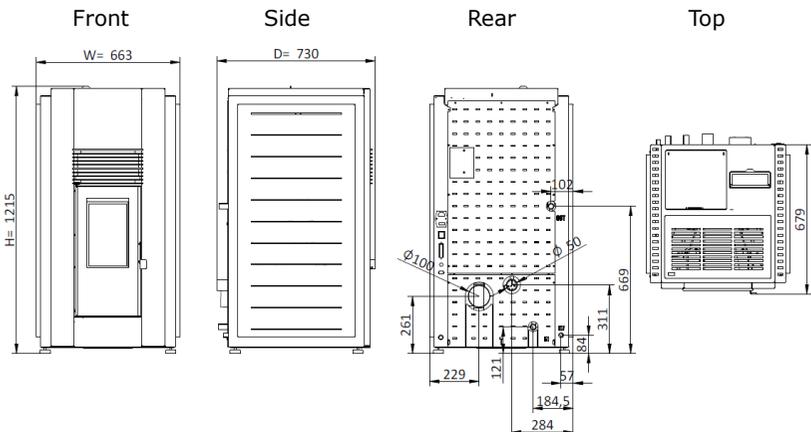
Dimensions of the free standing pellet fire unit (Douro 23 kW)
